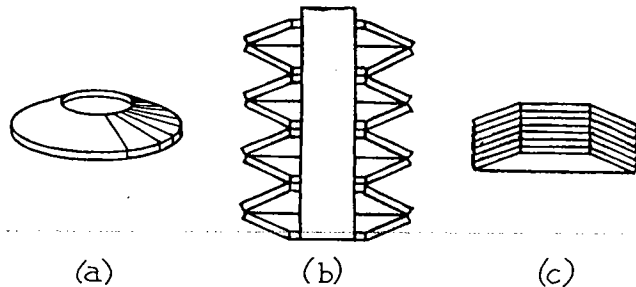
Belleville spring washers: (a) a disc spring; (b) stacked disc springs; (c) disc springs stacked in parallel.
